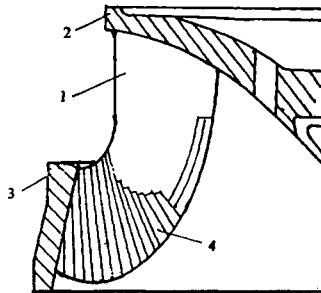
Arrangement of plates for paving welding on blades
